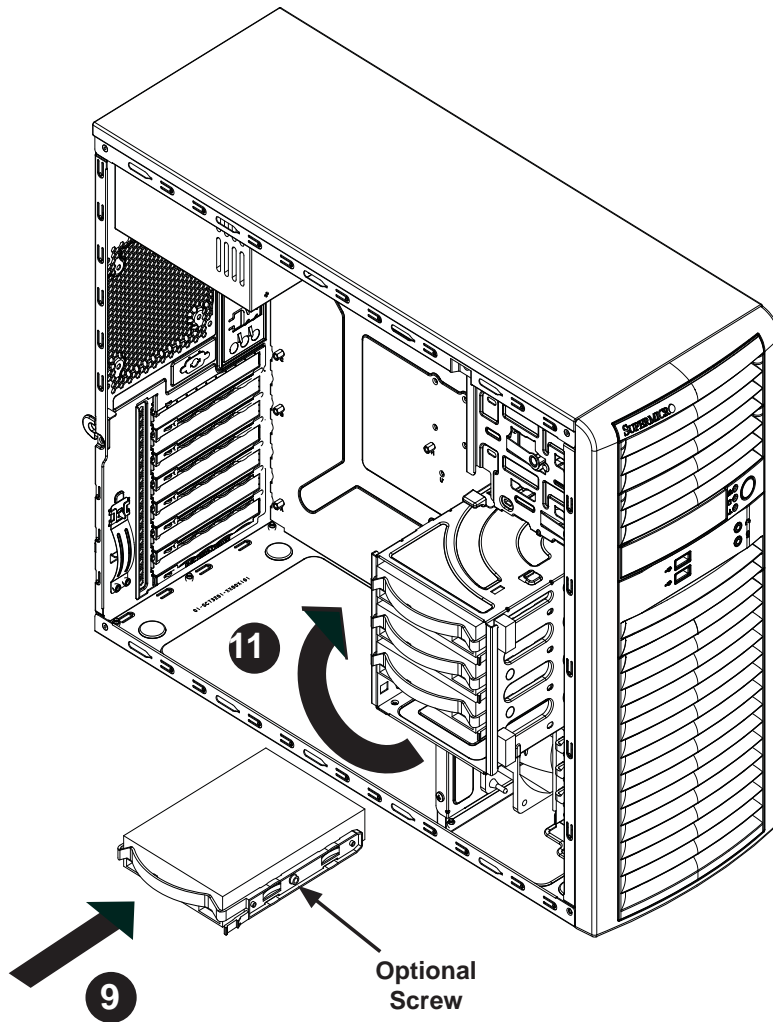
Installing a Hard Drive Carrier into the Hard Drive Cage
